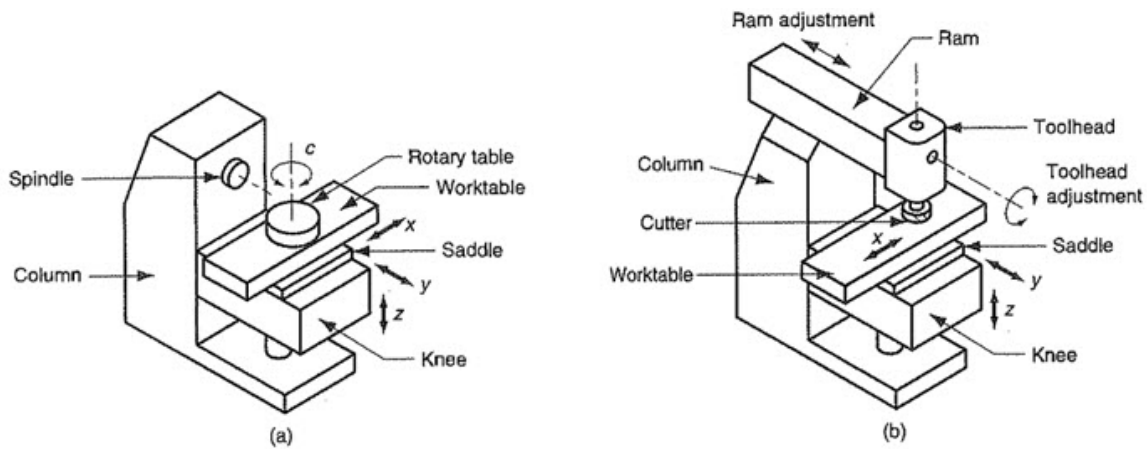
Special types of knee-and-column milling machine: (a) universal – overarm, arbor, and cutter omitted for clarity; and (b) ram type.
